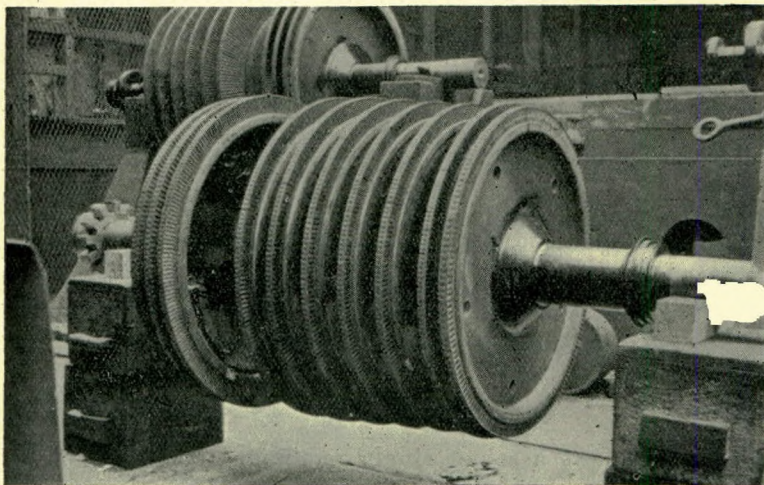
High pressure turbine rotor, 2,000 H.P. and designed for 3,500 r.p.m. Astern wheel with three rows of blades on left. Low pressure rotor in background, also designed for 3,500 r.p.m. Wheels are solid with spindle in H.P. rotor.
